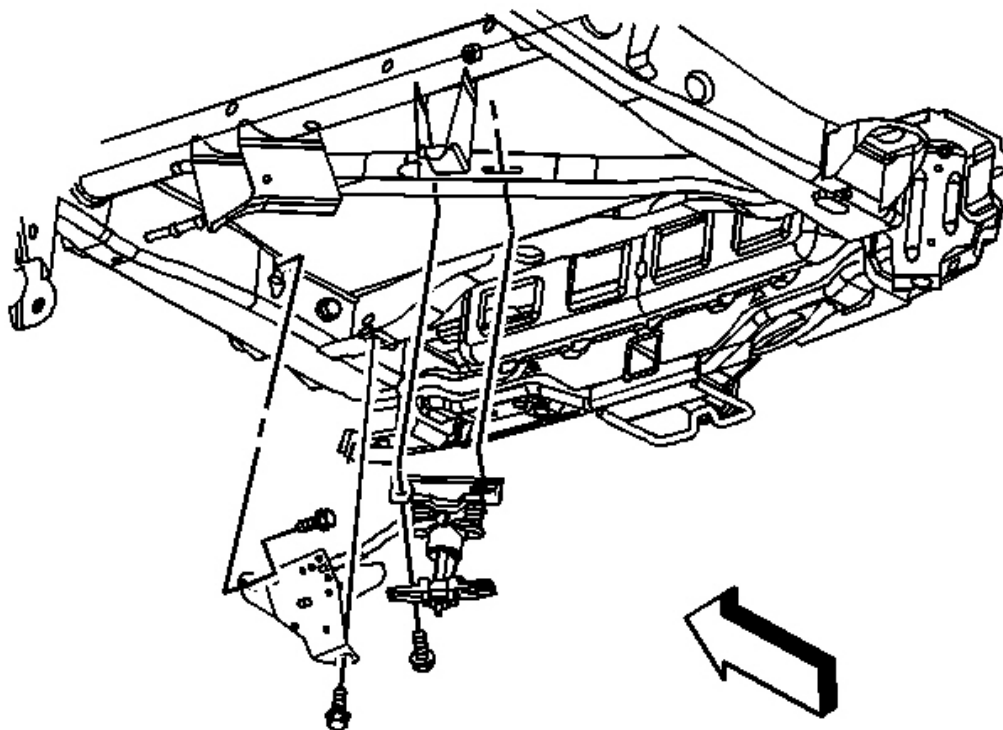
Removing/Installing Spare Wheel Hoist Assembly Mounting Bolts From Frame
